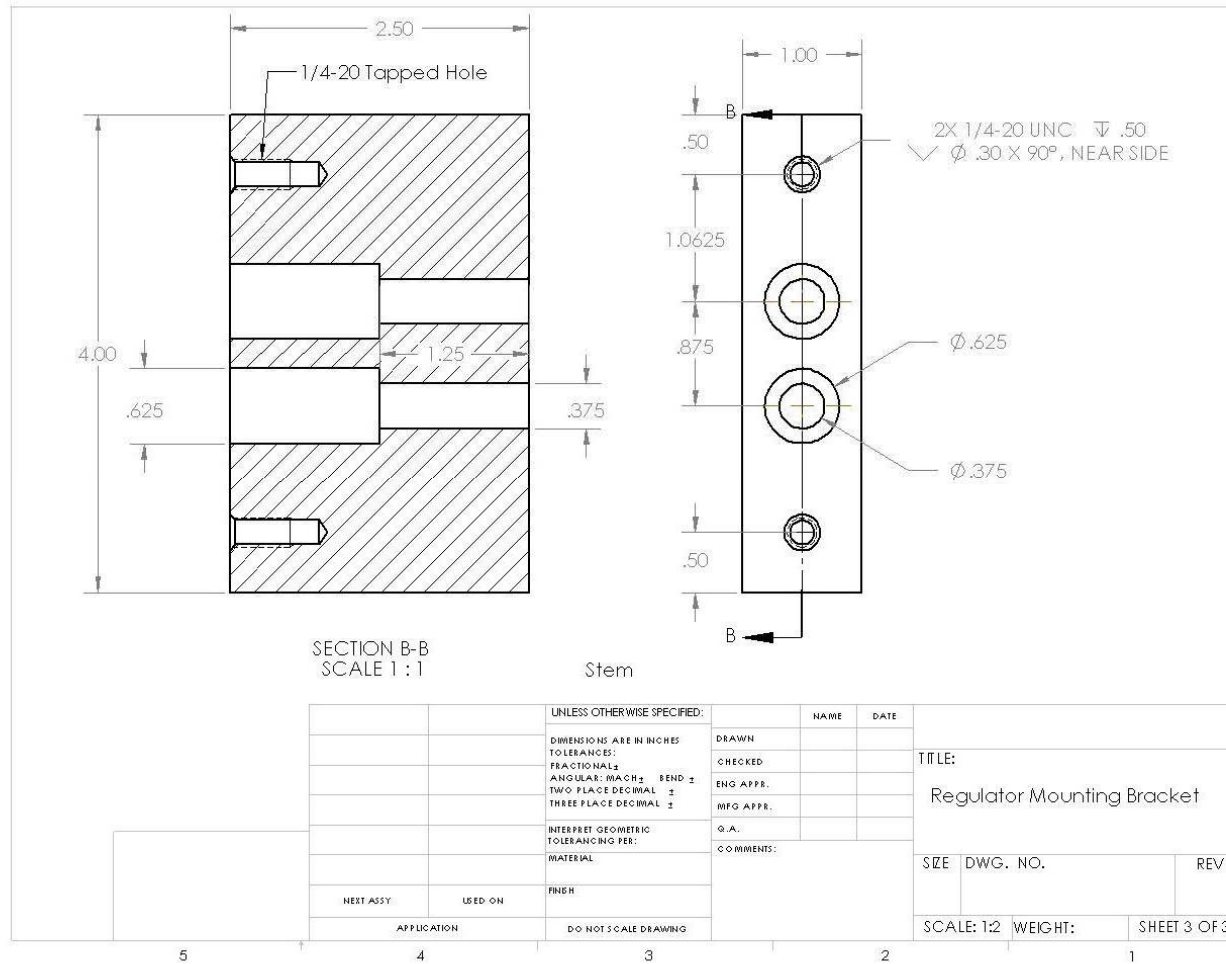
Regulator Mounting Bracket Sheet 3 of 3 (Stem)
